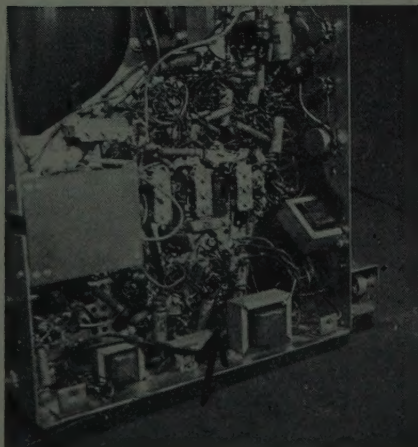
Tube socket and several components lack accessibility due to placement of choke.
